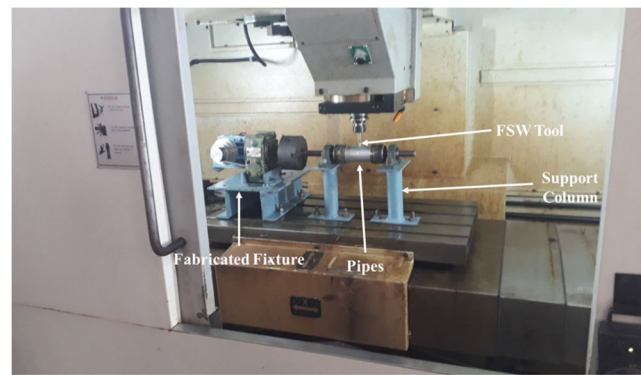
Developed rotary fixture for friction stir welding of pipe installed within CNC milling center
